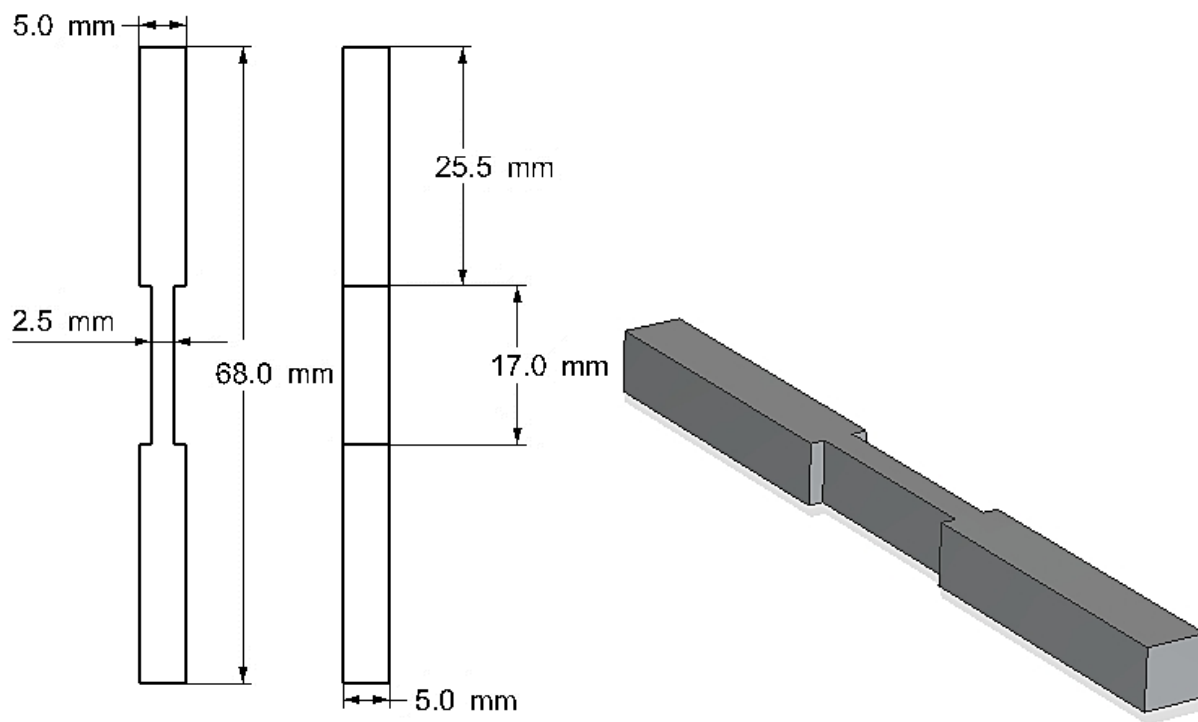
Schematic and 3D model of the tensile test specimen.
